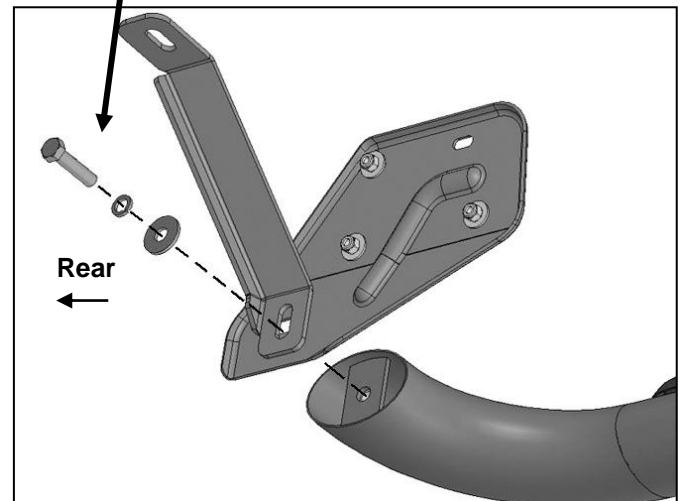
Attach end of the Sidebar to the driver/left front Bracket
